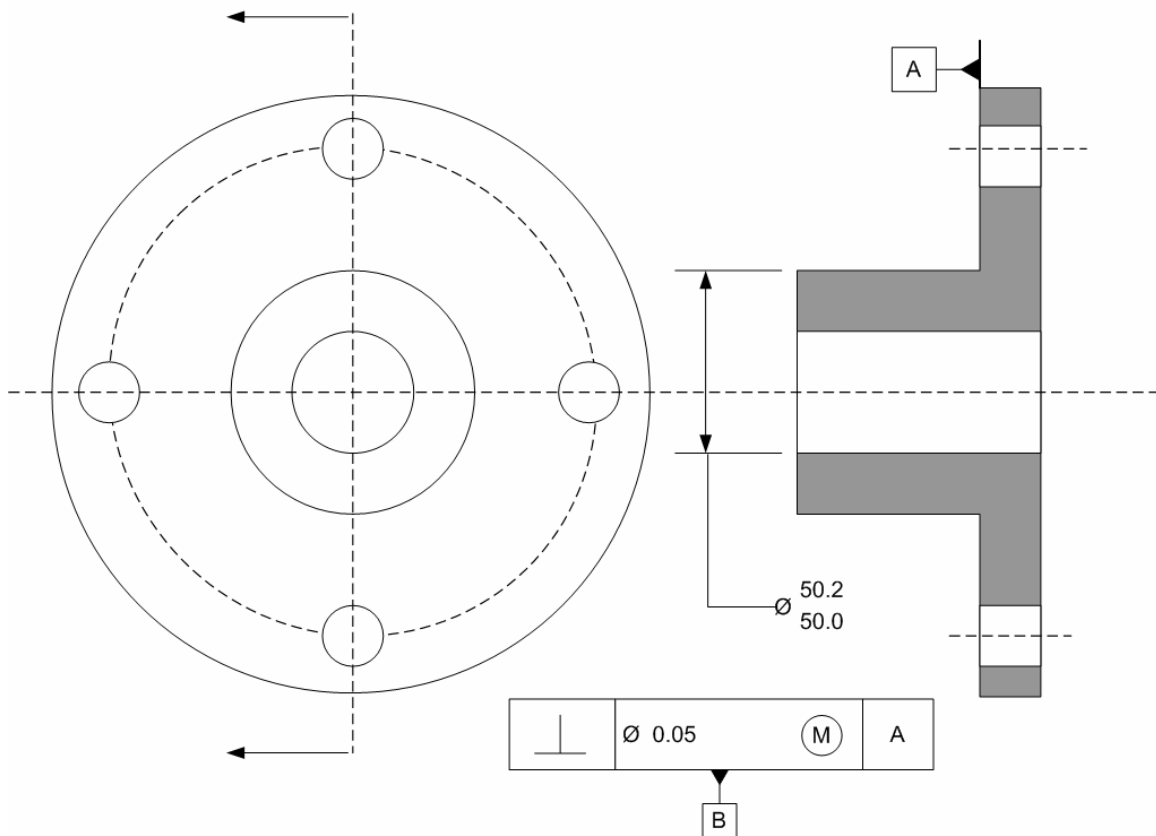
Perpendicularity\_tolerance for an axis
